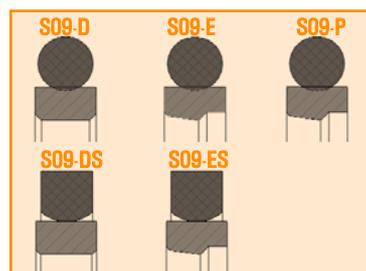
Examples of co-axial and in-line composite seals for rod sealing
